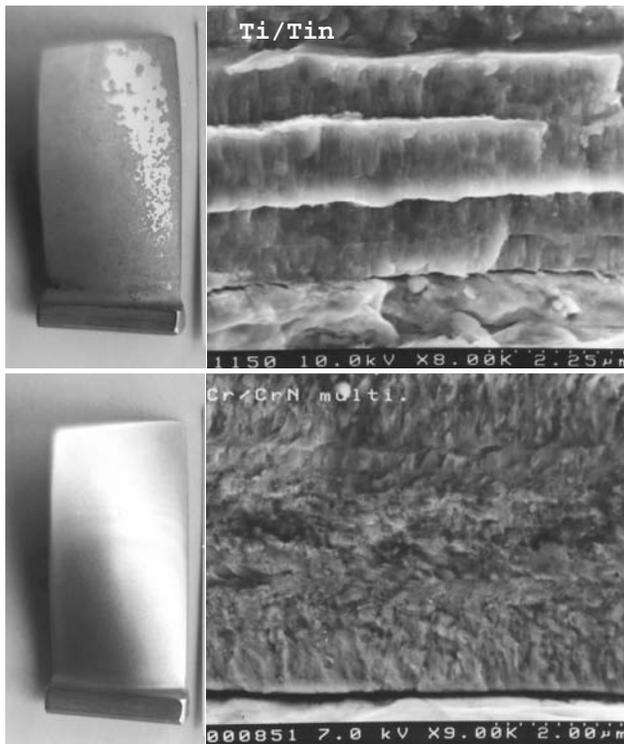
Fracture morphology of Ti/TiN and Cr/CrN multilayer coatings deposited by Arc-PVD method on compressor blades made of martensitic stainless steel. View of coated compressor blades after engine test
